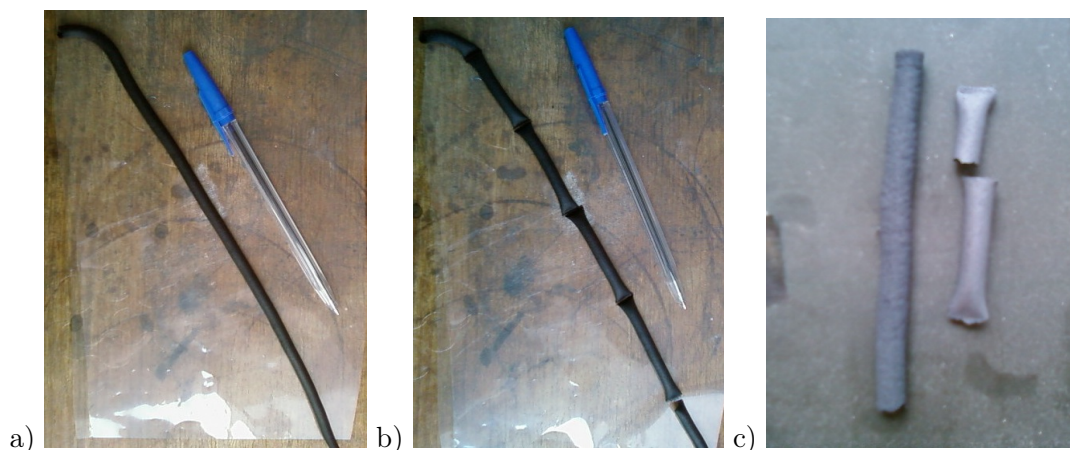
Tube extruded with recipe H-cell12, table 4.1.1 shown with a pen (biro) for scale, a) as extruded, b) after sectioning with a spatula - each section is subsequently cut in half to produce two tubes sealed at one end and c) tube as extruded (left) and tubes after sintering with one end sealed (right).
